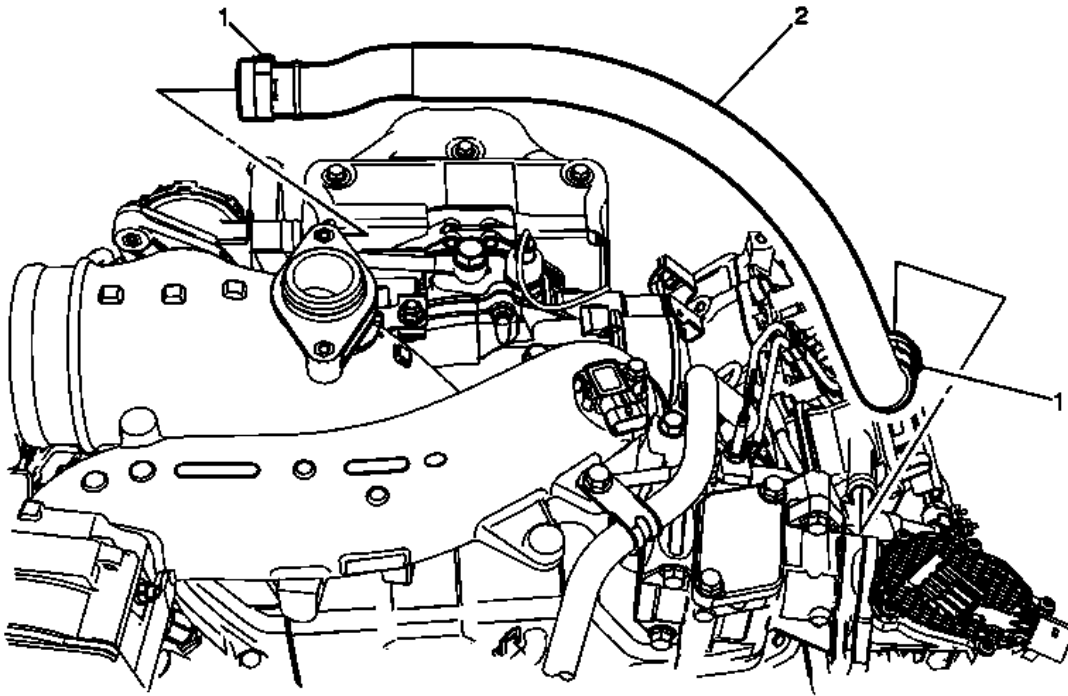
Positive Crankcase Ventilation Hose And Clamps
